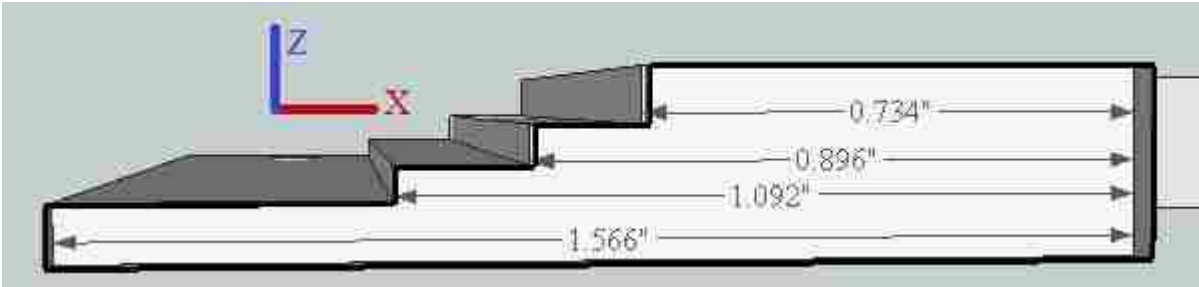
Cross sectional view of the 10x10 cm² lower trimmer lead plate illustrating the in-plane and cross-plane lateral dimensions of the plate. The lower trimmer is square, such that all non-hole dimensions are equal in the in-plane and cross-plane dimensions.
